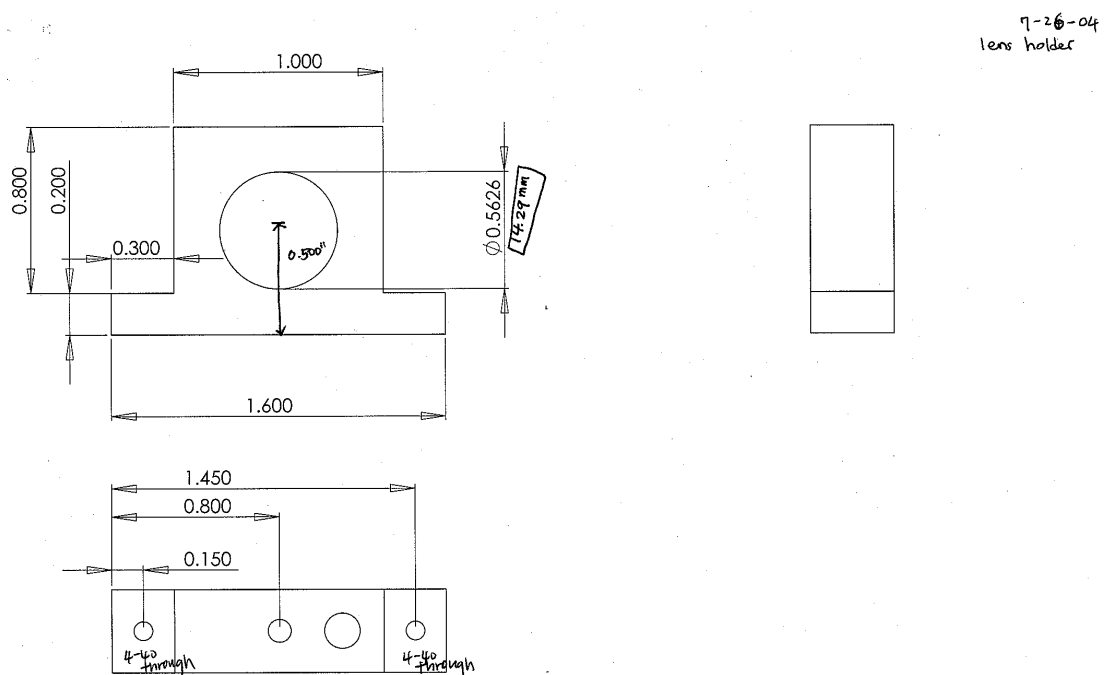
Detailed dimensions of the lens holder that is used to collimate laser beams going into and out of the TA chip.
